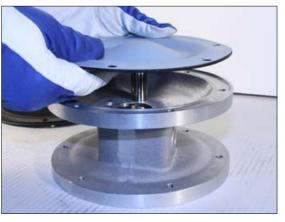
Mount the diaphragm shaft (16) on the diaphragm (15) and push the assembly carefully through the hole in the centerblock (12). Screw the next diaphragm (15) onto the shaft (16) and fix the holes. Sometimes you have to turn the diaphragms a little back to get the holes positioned.
